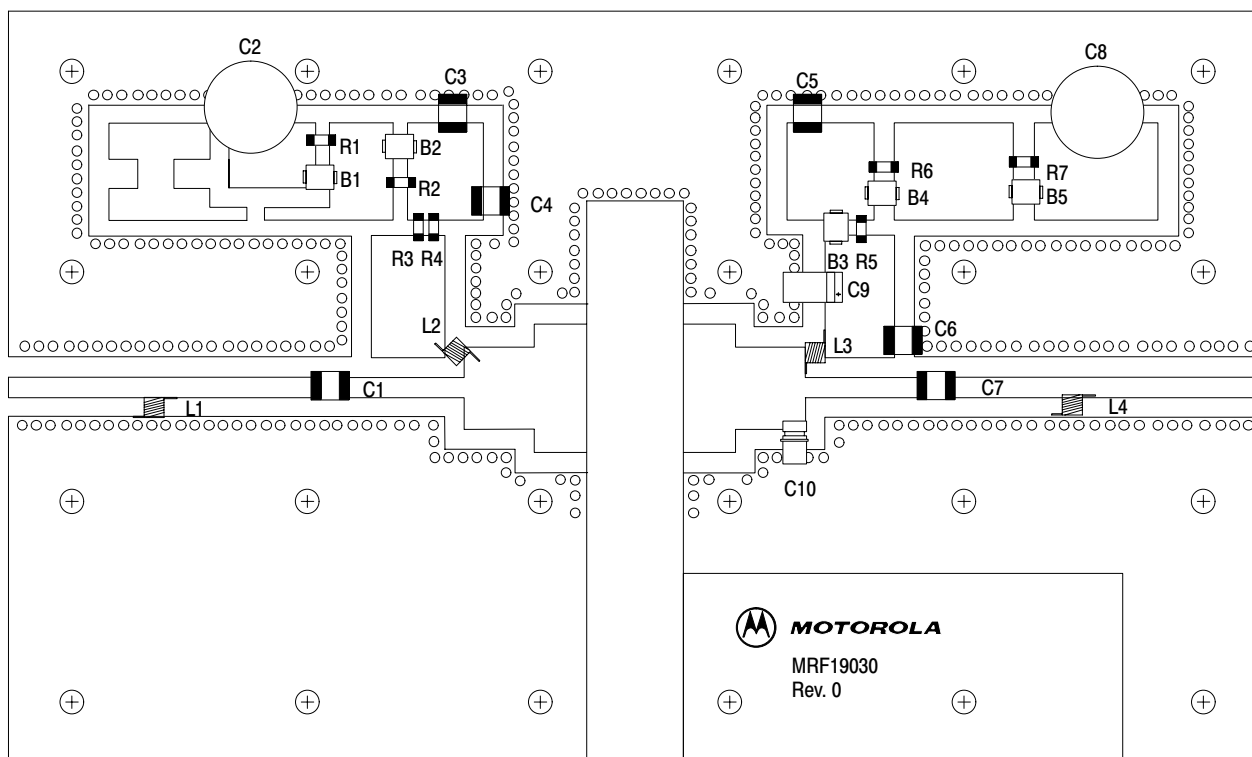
MRF19030LR3(LSR3) Test Circuit Component Layout
